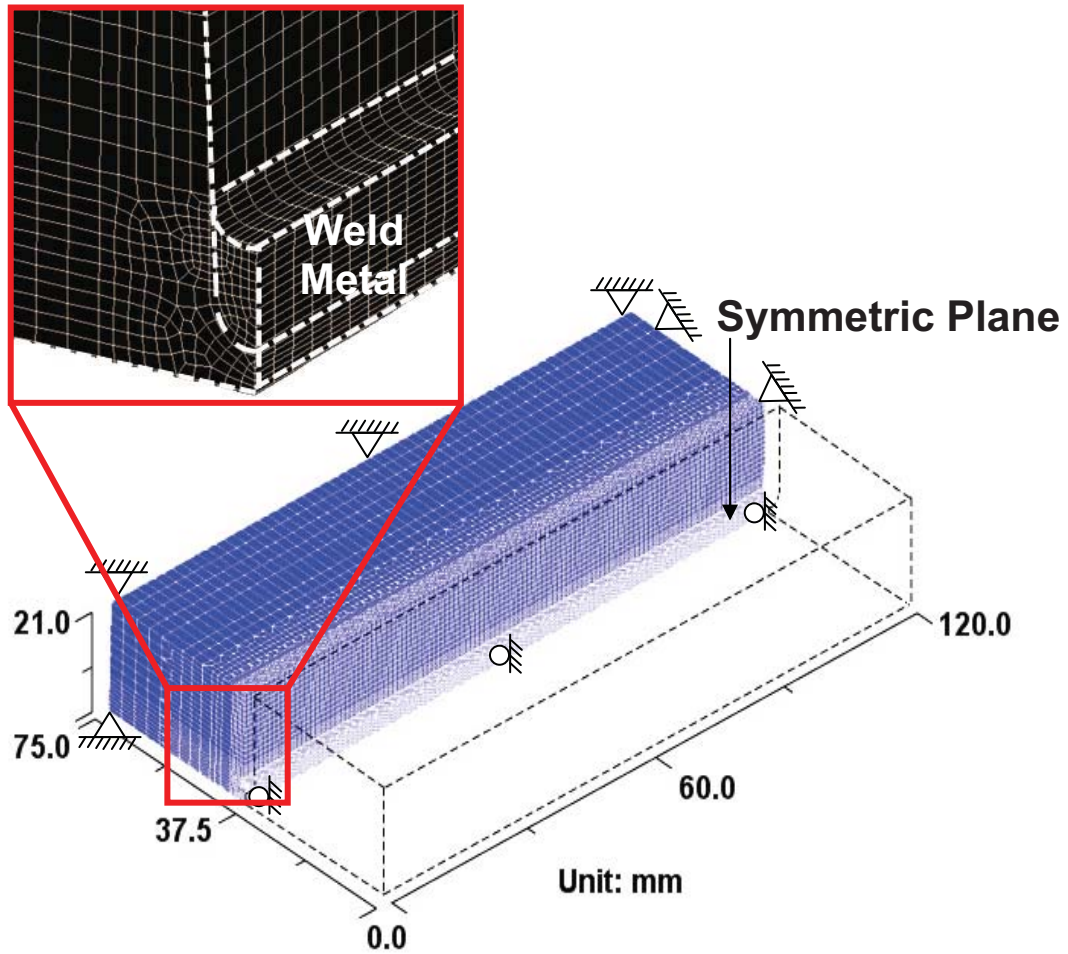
Illustration of 3-D FEM model of a narrow welding.
